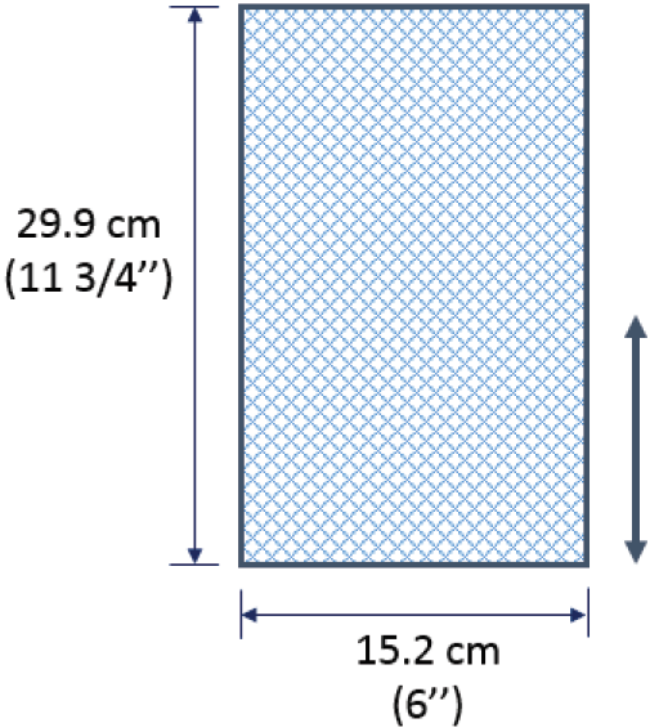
Dimensions of in-plane shear test specimen [36]
